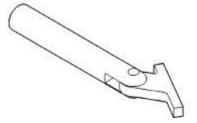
Indicator Bore Size C-119 Courtesy of CHRYSLER LLC
